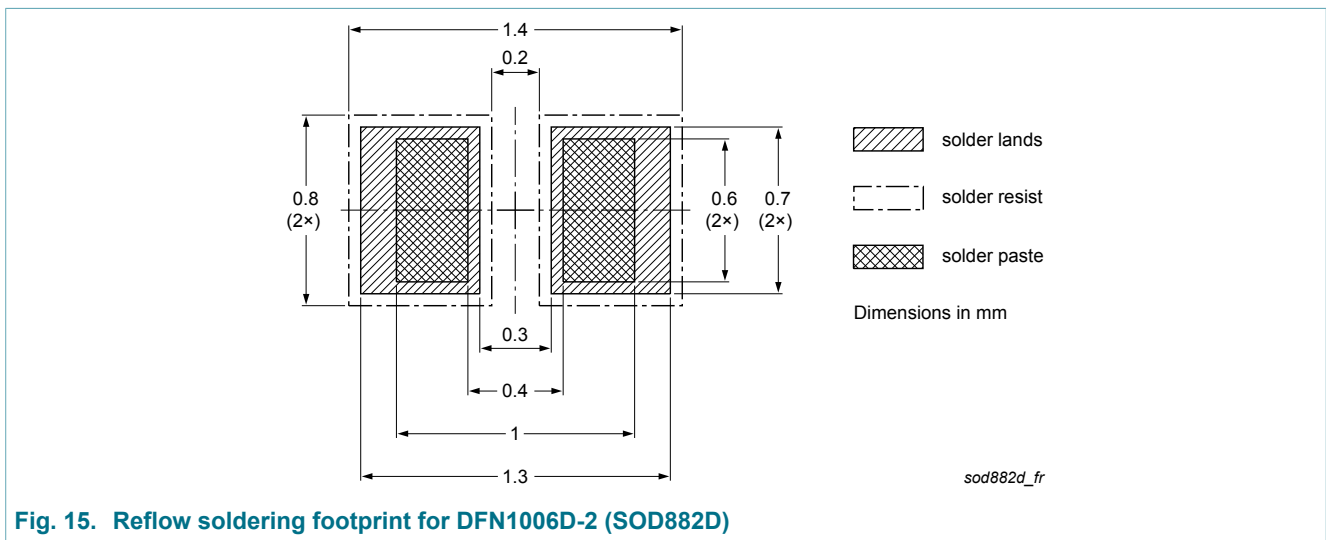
Reflow soldering footprint for DFN1006D-2 (SOD882D)
